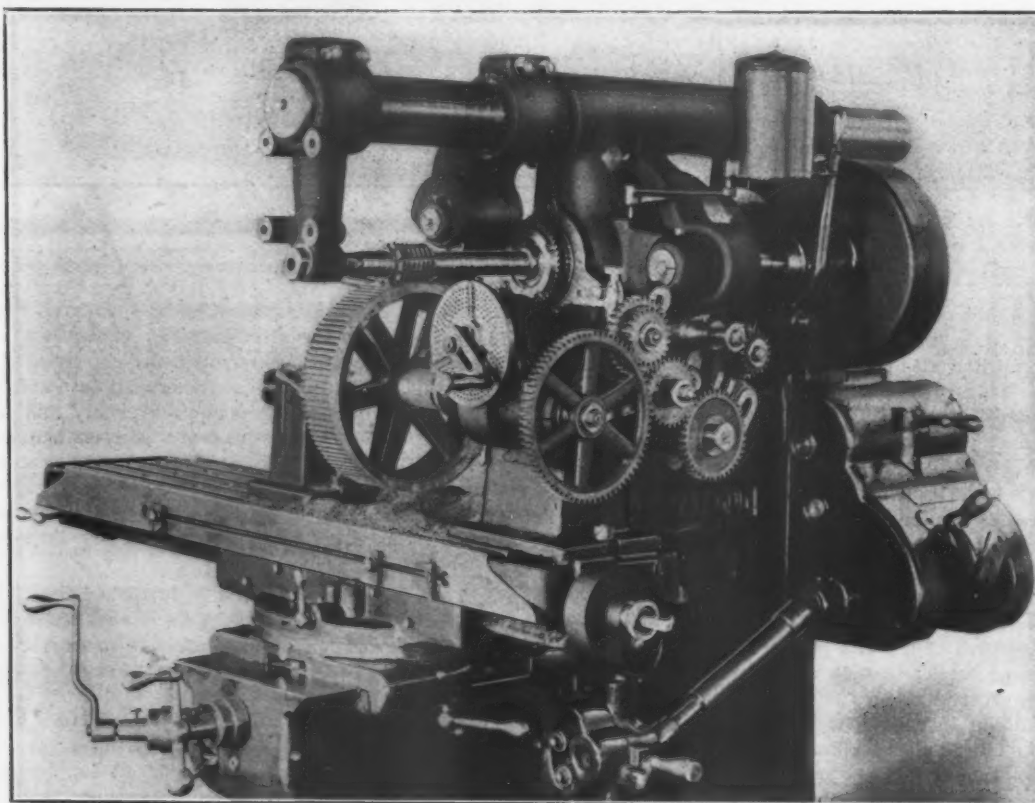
Two Larger Gears Being Cut at One Setting with the New Hobbing Attachment.
